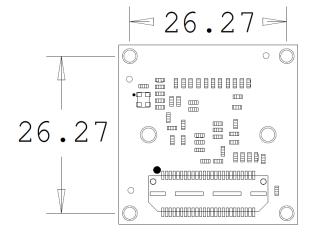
e-CAM10\_CU0130\_MOD bottom drawing (mirrored)
